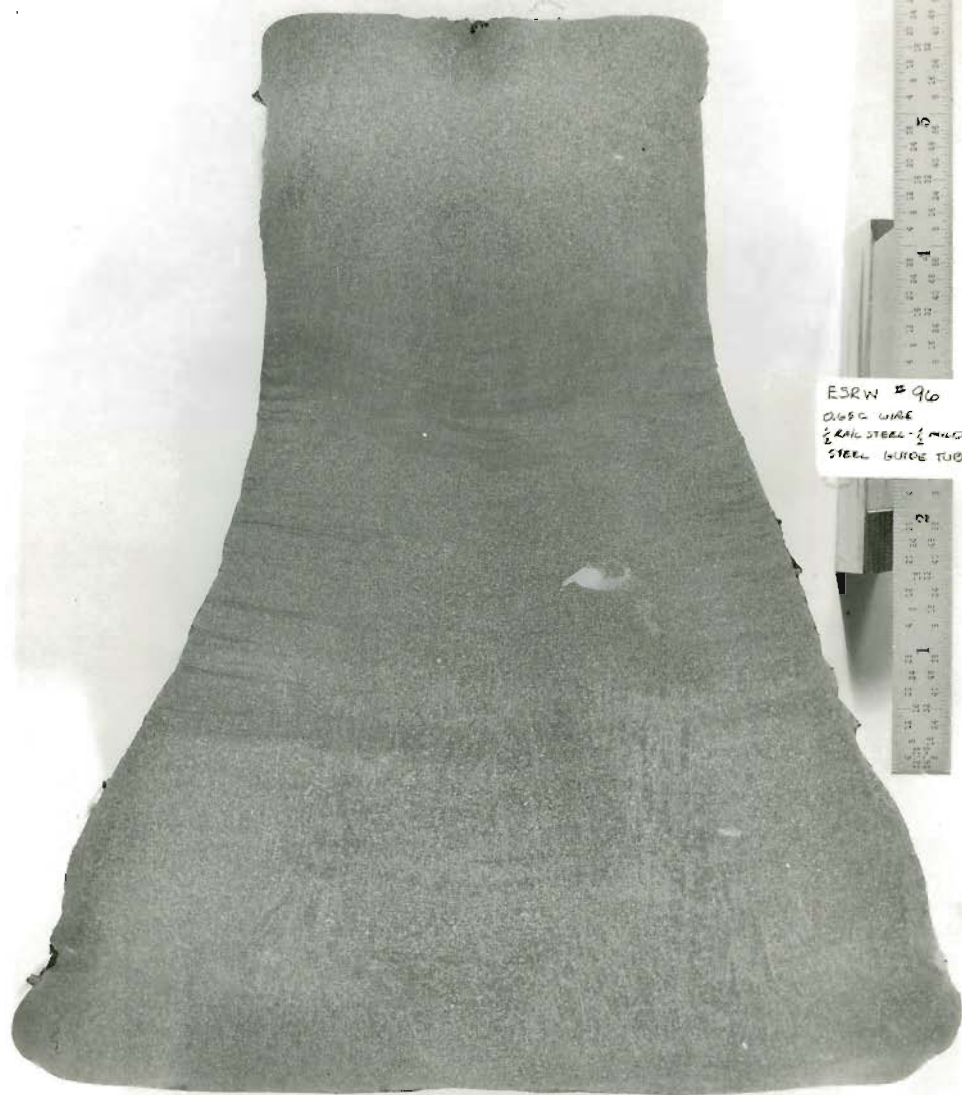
TRANSVERSE MACROSECTIONS OF RAIL WELDS.
